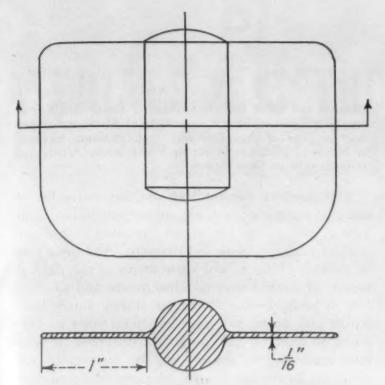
On small globular-centered forgings, the projecting fin may be forged to a minimum of 1/16 in. with a width of no more than 1 in.
